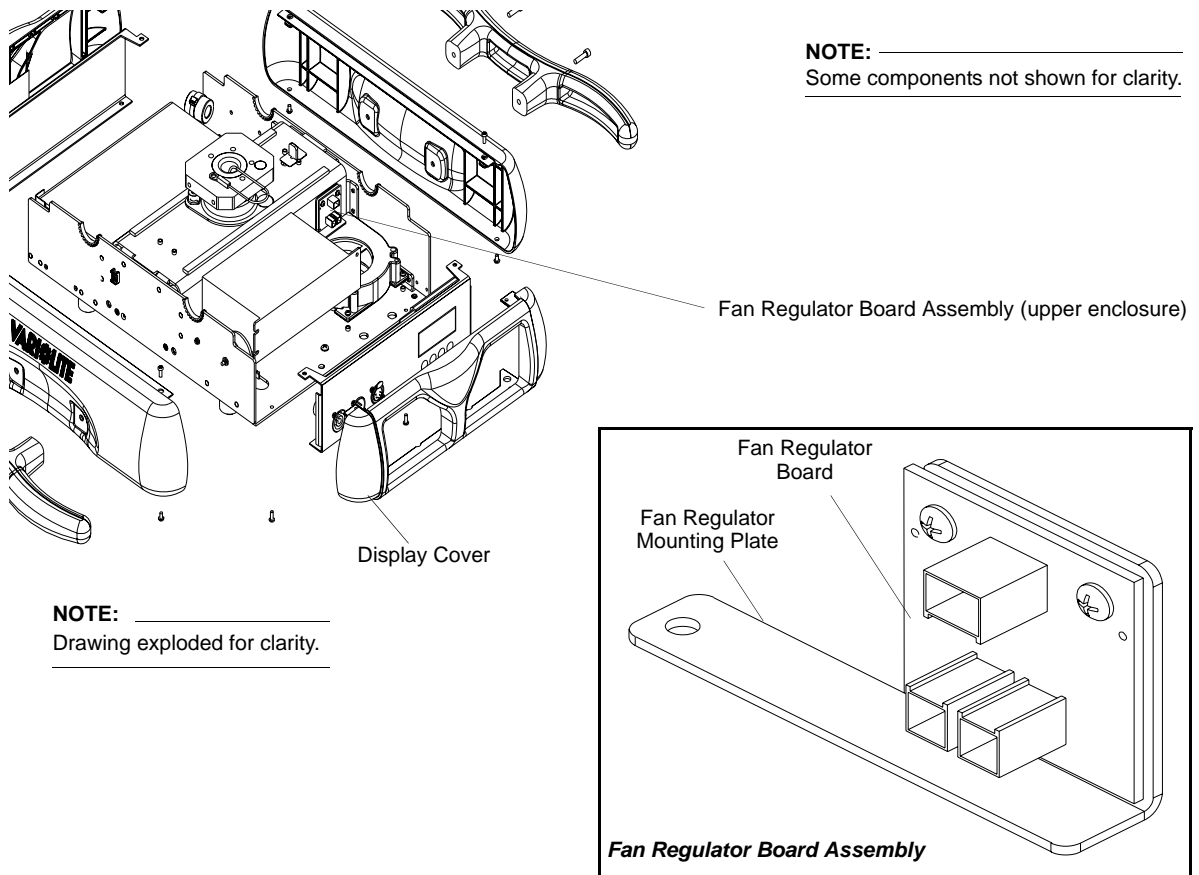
Fan Regulator Board (Upper Enclosure) Replacement
